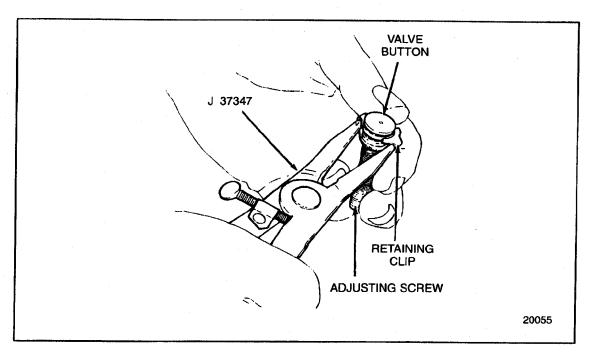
Valve Button Retainer Clip Removal and Installation
